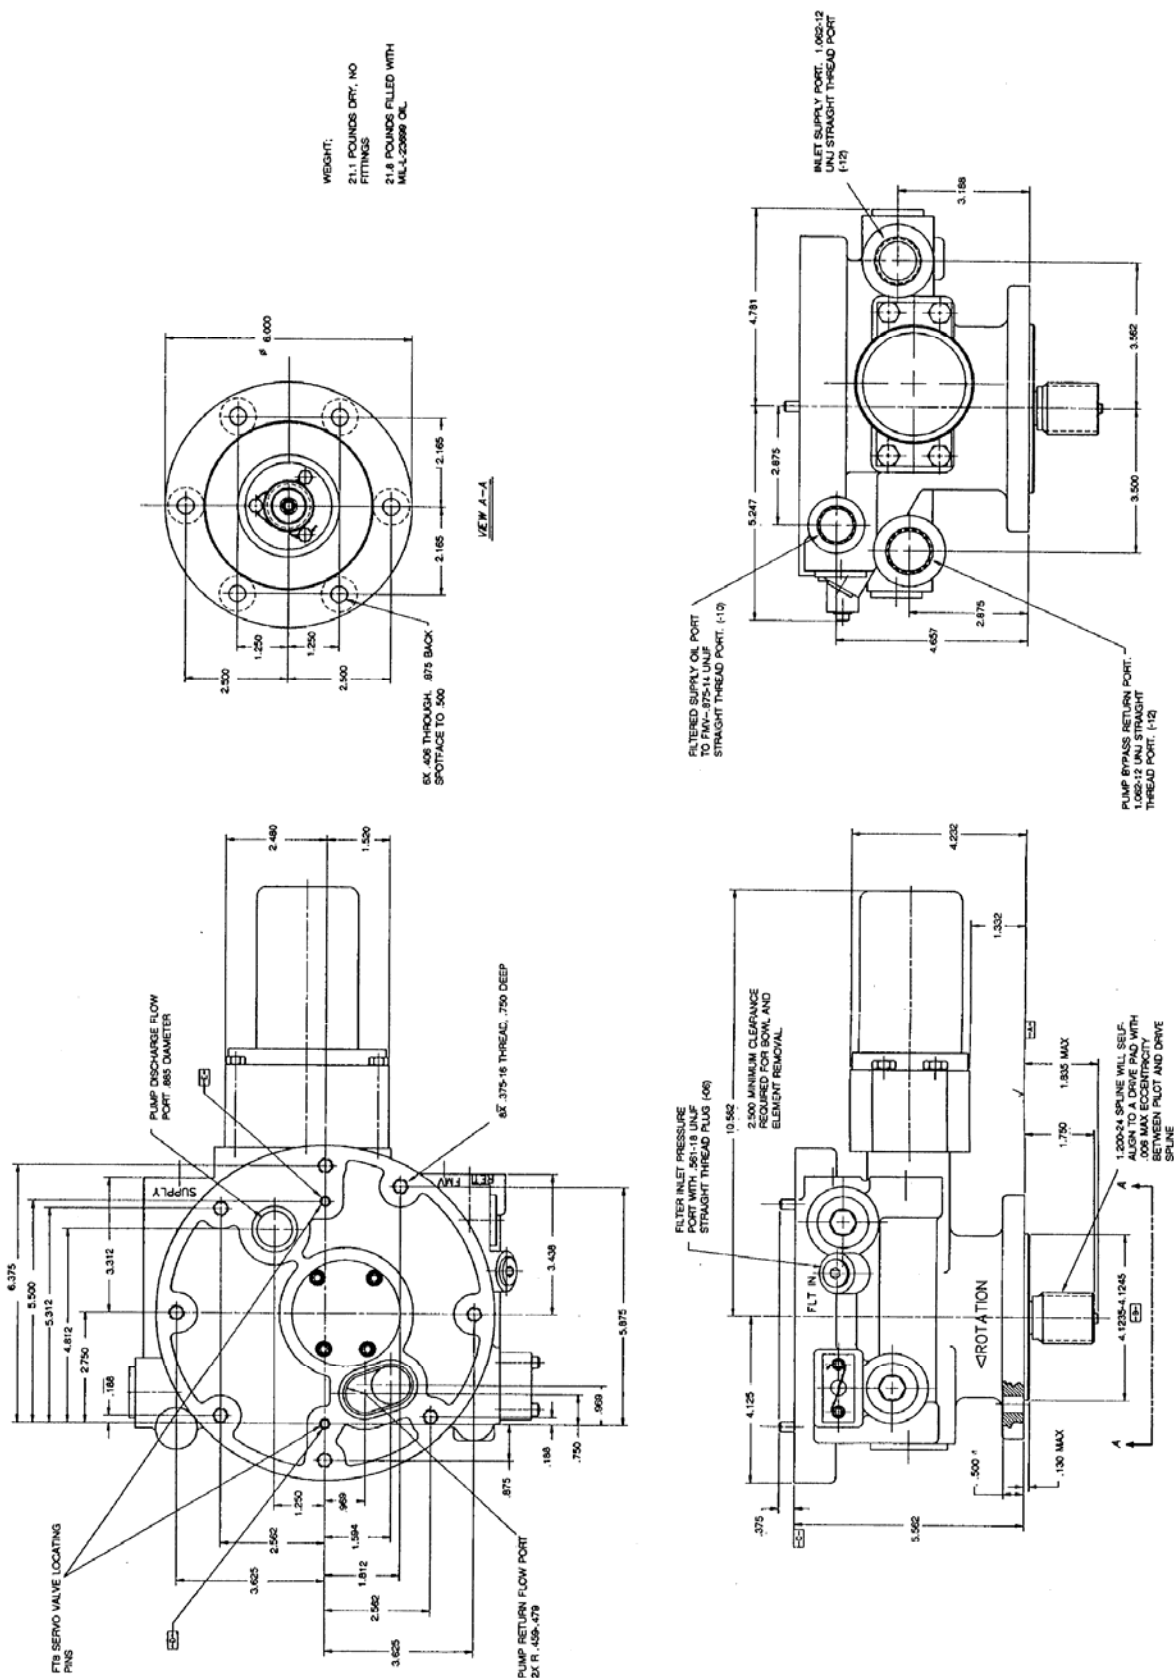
Outline Drawing of 3230 Hydraulic Pump
